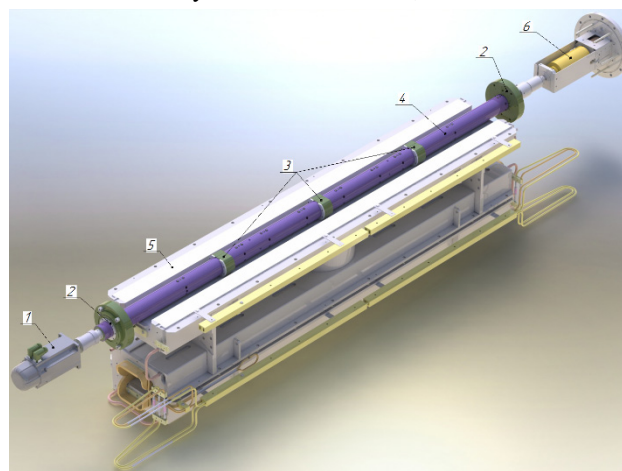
3D model of an equipment for MM: 1. Servomotor, 2. Outer bearings, 3. Inner bearings, 4. Measuring shaft, 5. Yoke, 6. Slip rings and angle encoder.
